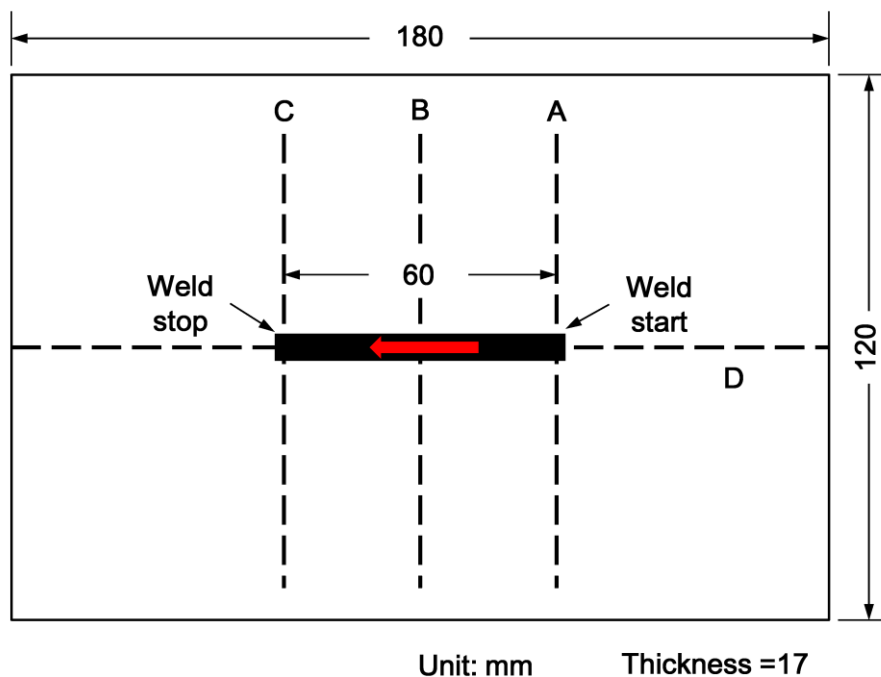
Schematic diagram of NeT single weld bead-on-plate specimen.
